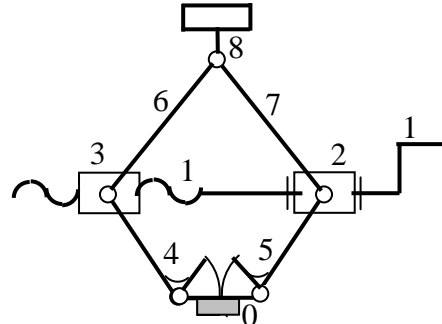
Lifting mechanism with screw, pentagonal chain and cylindrical gear
